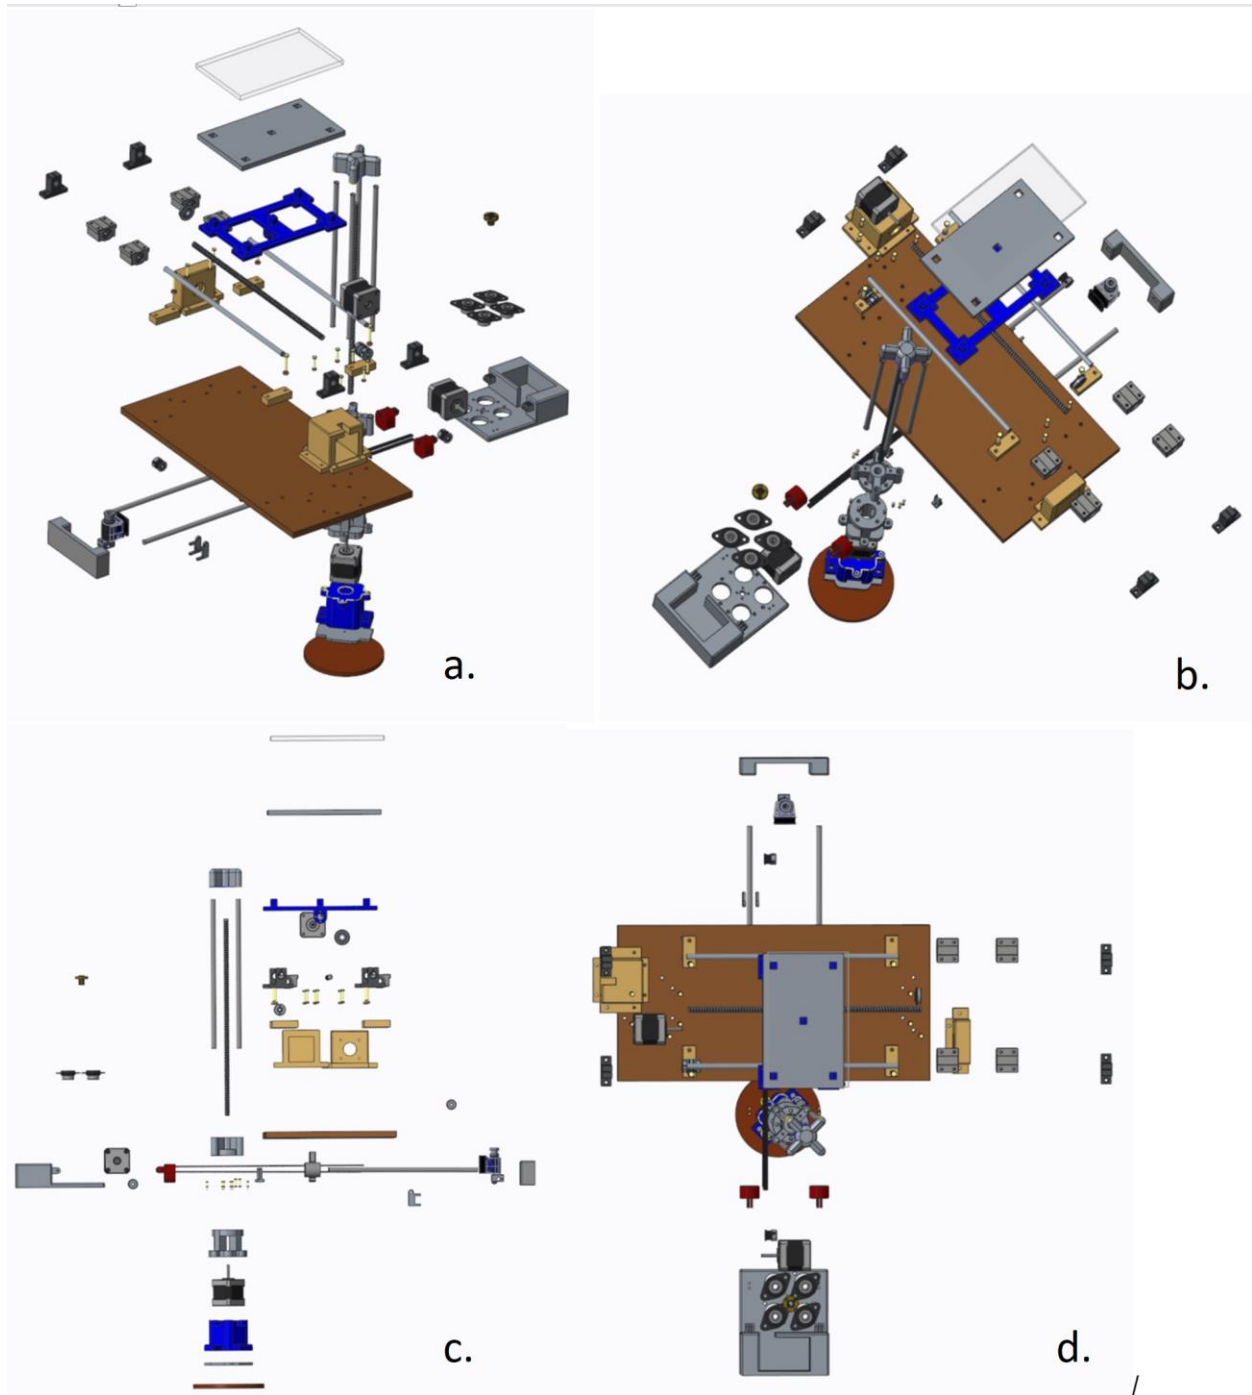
Exploded View CAD of Solargami; a. isometric b. top isometric c. side view d. top view
